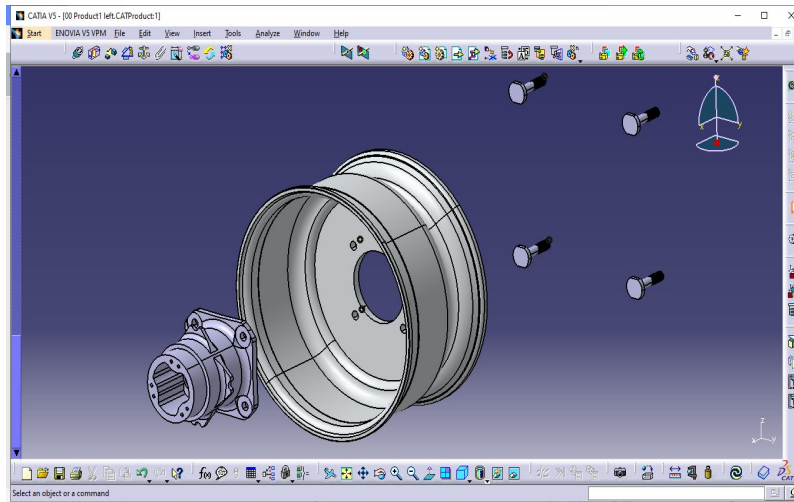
Exploded view of Hub, Rim and Stud Bolts
